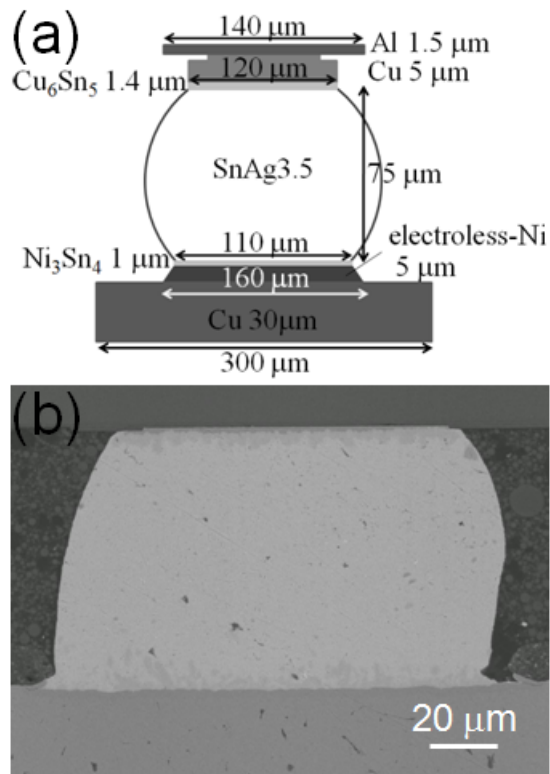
(a) The cross-sectional schematic shows the flip-chip solder joints from Megic. (b) The cross-sectional SEM image of flip-chip solder joints as prepared by Megic.
